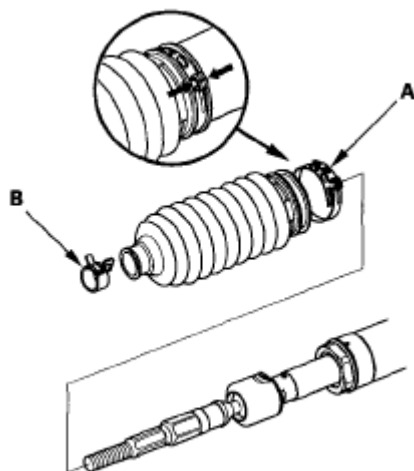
Identifying Boot Bands And Tie-Rod Clips
